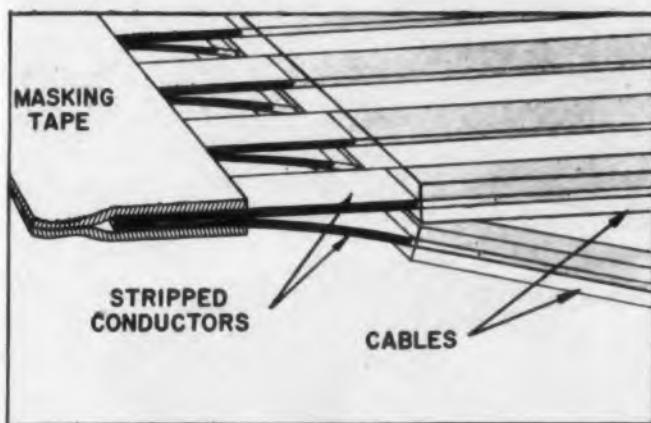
Cables that have end stripped conductors are taped together for soldering.
